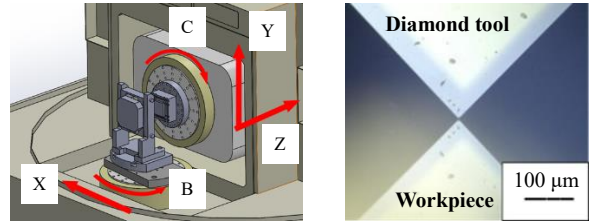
Machine tool structure Fig. 2 Setting of cutting origin
